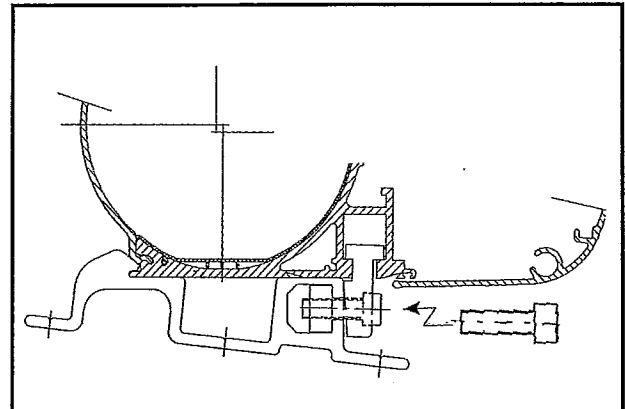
C Secure box to Plate via threaded inserts and "T" connectors.
